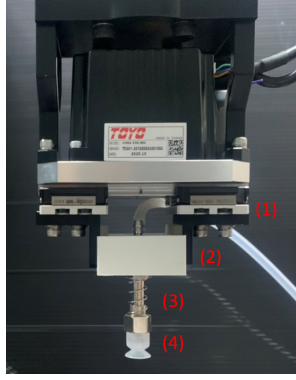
sucking tool, (1)gripper (2)adapter (3)metal tube (4)sucker head
